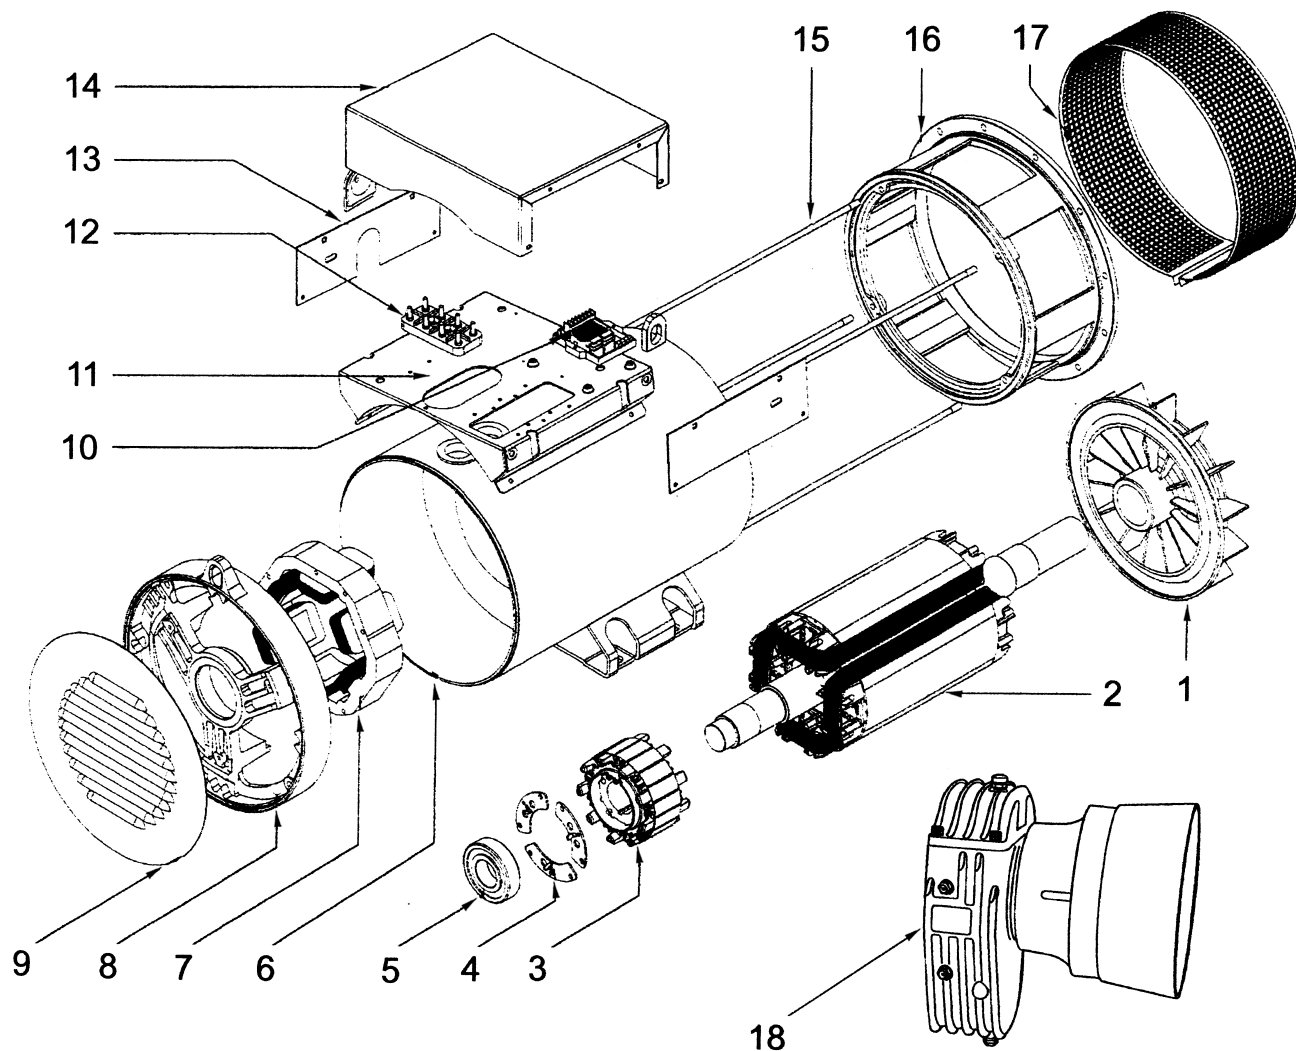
Parts Explosion for PTO 40-1, PTO 50-1, PTO 65-1, PTO 75-1, PTO 55-3, PTO 70-3, PTO 90-3, PTO 110-3
